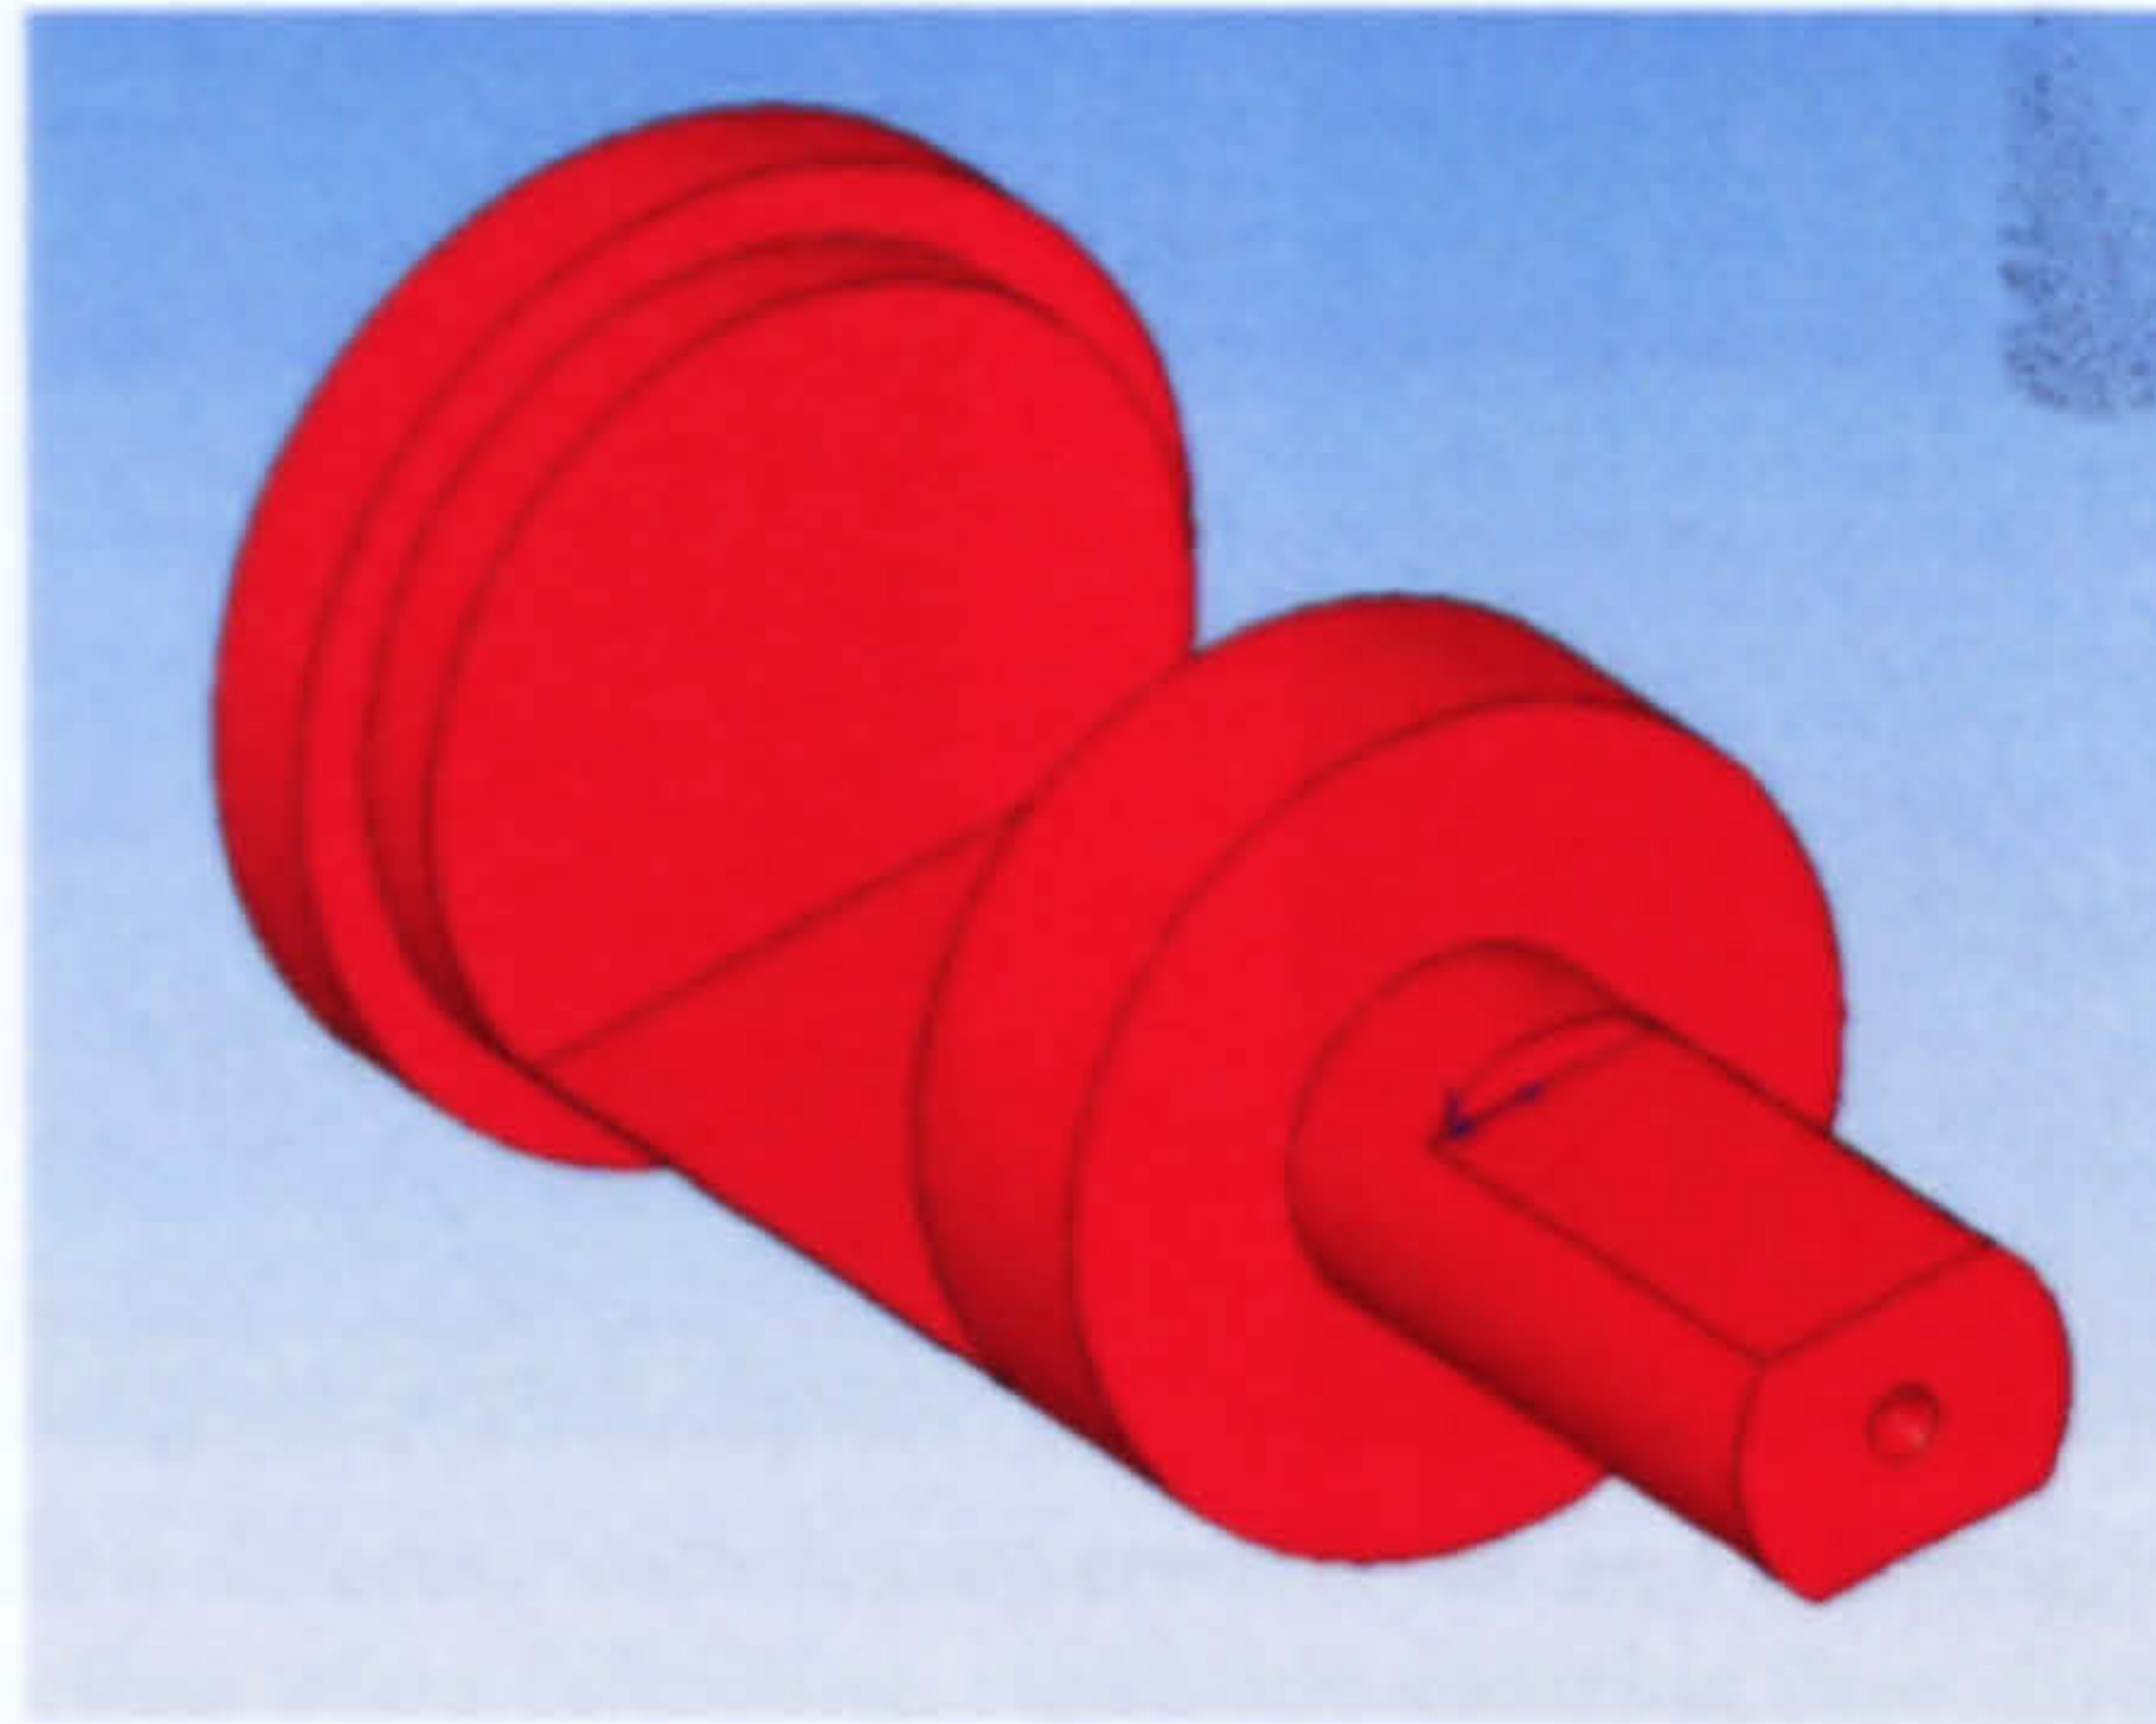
, CAD drawing showing scraper positioning, fluid flow direction and the physical boundaries employed to isolate the grinding contact zone flow.
